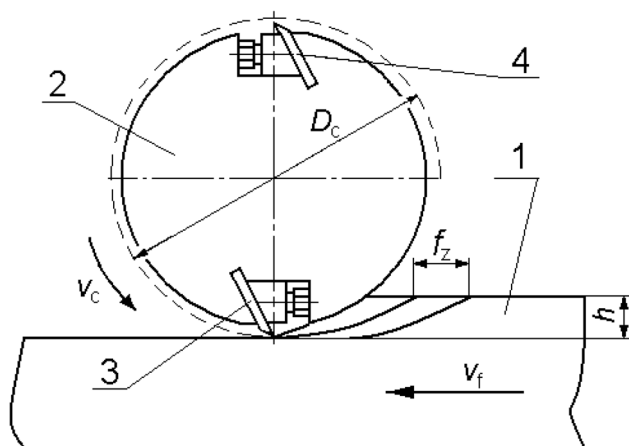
Scheme of longitudinal milling: 1 specimen, 2 cutterhead, 3 examined cutting tool, 4 balance tool, D_c cutting diameter (103 mm), v_c direction of cutting speed, v_f direction of feed rate, f_z feed per insert, h cutting depth (2 mm)
